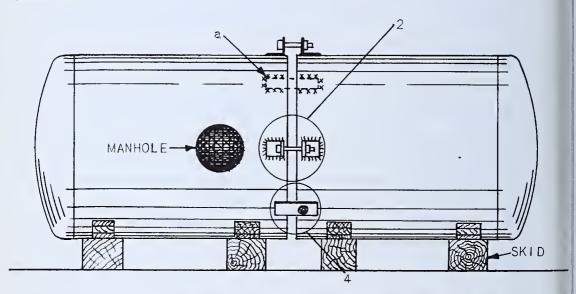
Cylindrical Shell in Preparation for a Girth-Seam Weld
